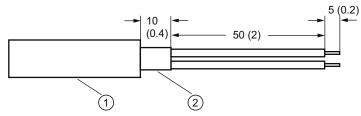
PROFIBUS cable, dimensions in mm (inches)
